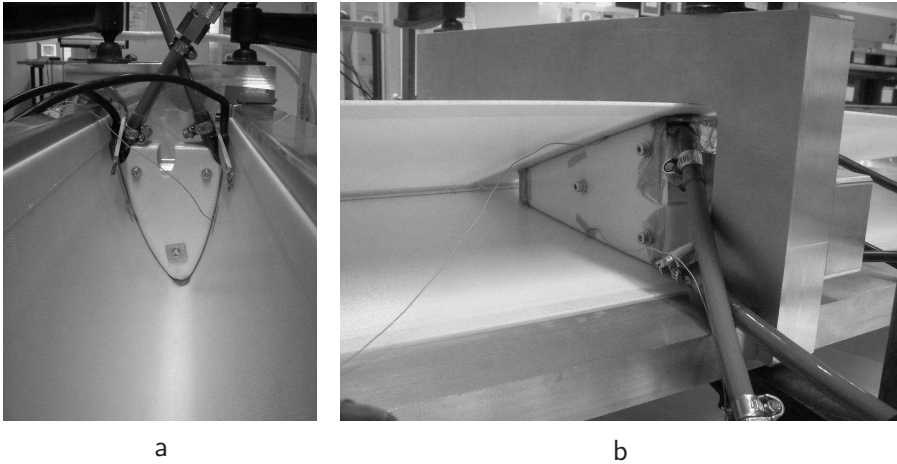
Welding proces. a) Nose weld. b) Tail weld. In both cases the power cable (black) and tubes supplying air pressure to the blatters (grey with hose clamps) can be seen. The respective welding jigs are on the back of the ribs, but the bolts with which the ribs are bolted to the jigs can be seen. In b) also the support holding the suction side panel in place can be seen.
